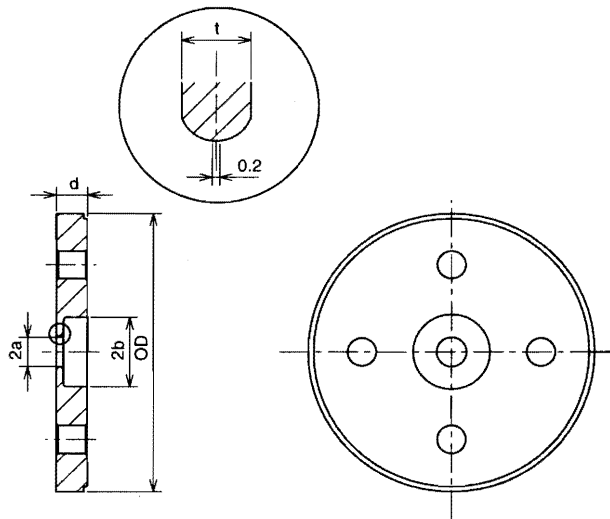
Schematic drawing for the regular cell. The shape for the detuned structure is essentially the same. OD is 80mm and d 8.7474mm. In the middle of the beam hole, the shape is flat in the cross-sectional view. This is to make sure that the connection from the curved section to this flat, 0.2mm-long section can be with a finite angle so that the burrs etc. can be minimized.
